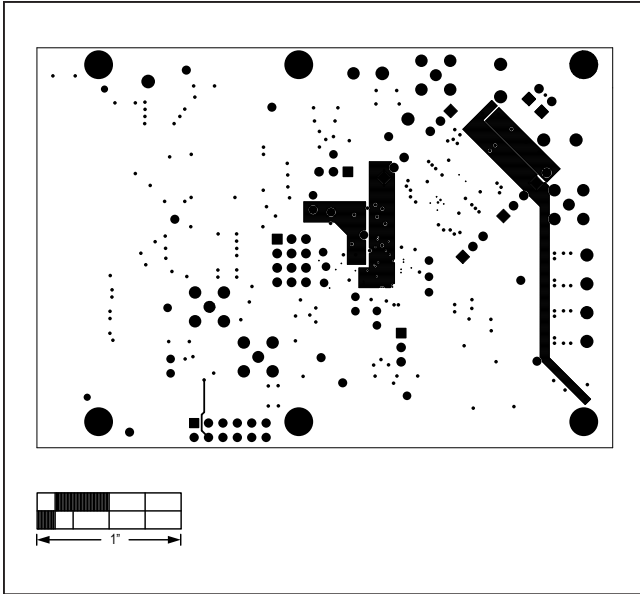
MAX11905 Differential EV Kit PCB Layout—Layer 4
